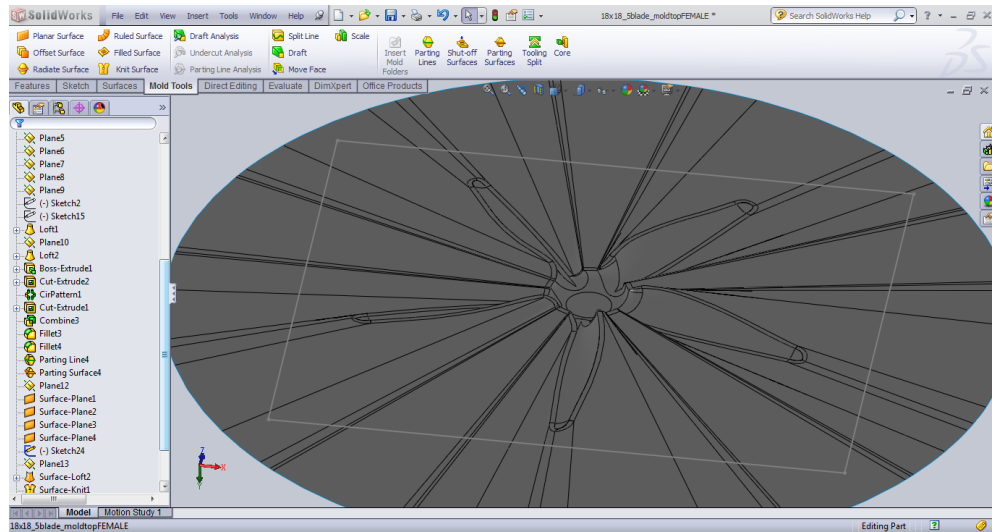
Draft Analysis of 5-bladed propeller in SolidWorks
